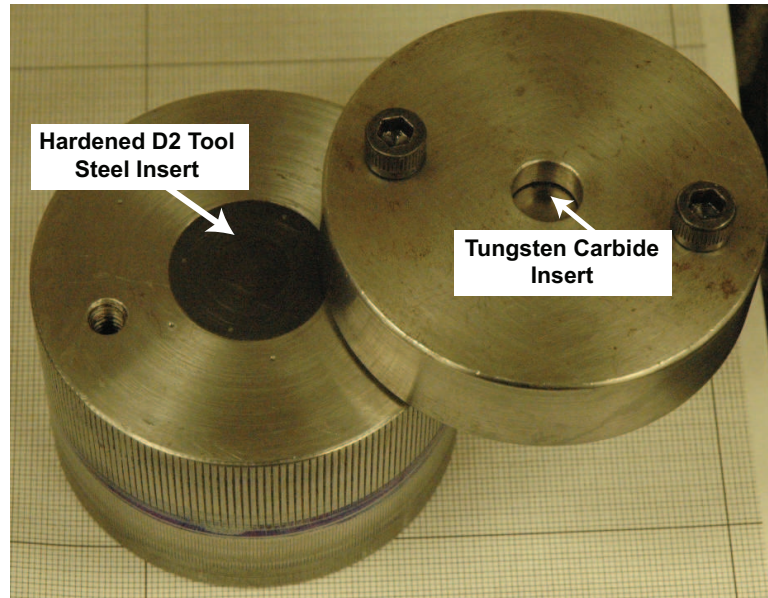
A photograph of the disassembled top platen showing the two tungsten carbide inserts and hardened D2 tool steel inserts. The inserts are sequentially placed to relieve the contact stresses between the tungsten carbide loading pins and the steel platen.
